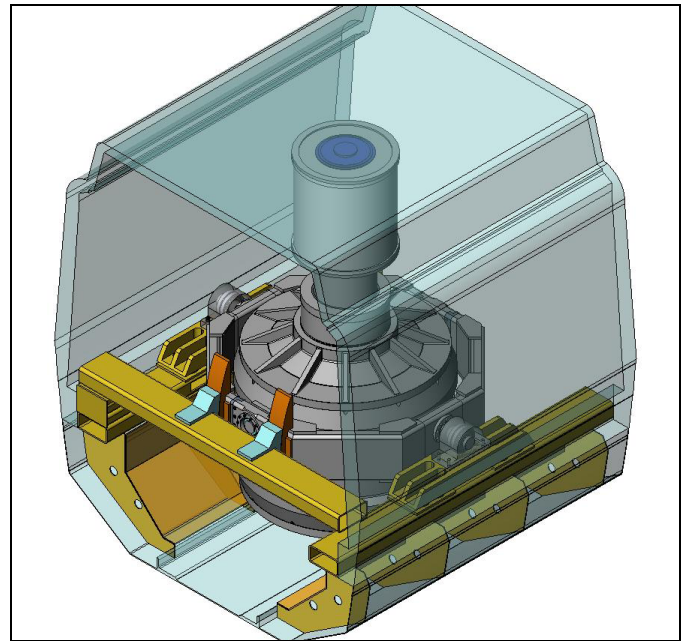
ALPS flywheel and motor-generator in locomotive gimbal frame.
